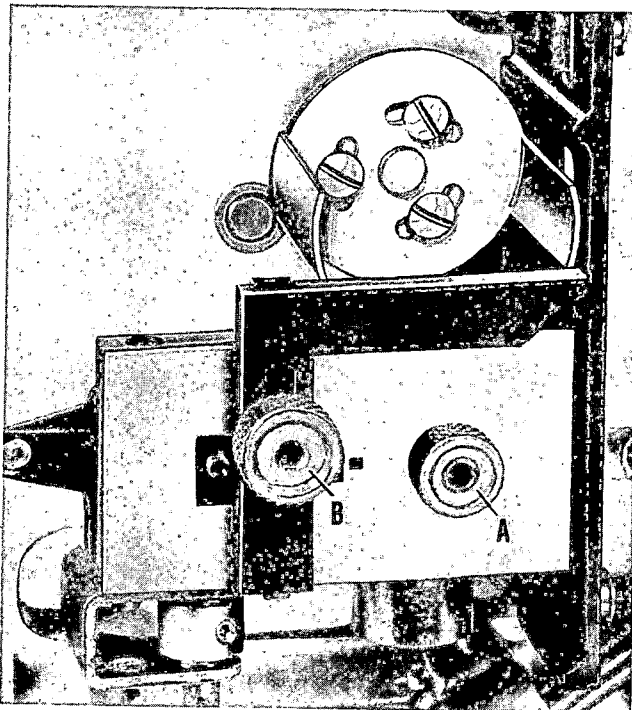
Synchronizing the Shutter and Intermittent Mechanism
